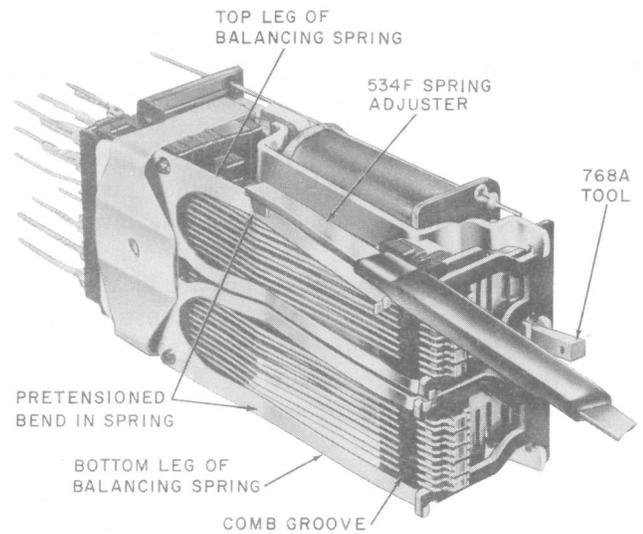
Method of Adjusting Balancing Spring Tension—AM-Type Relay
